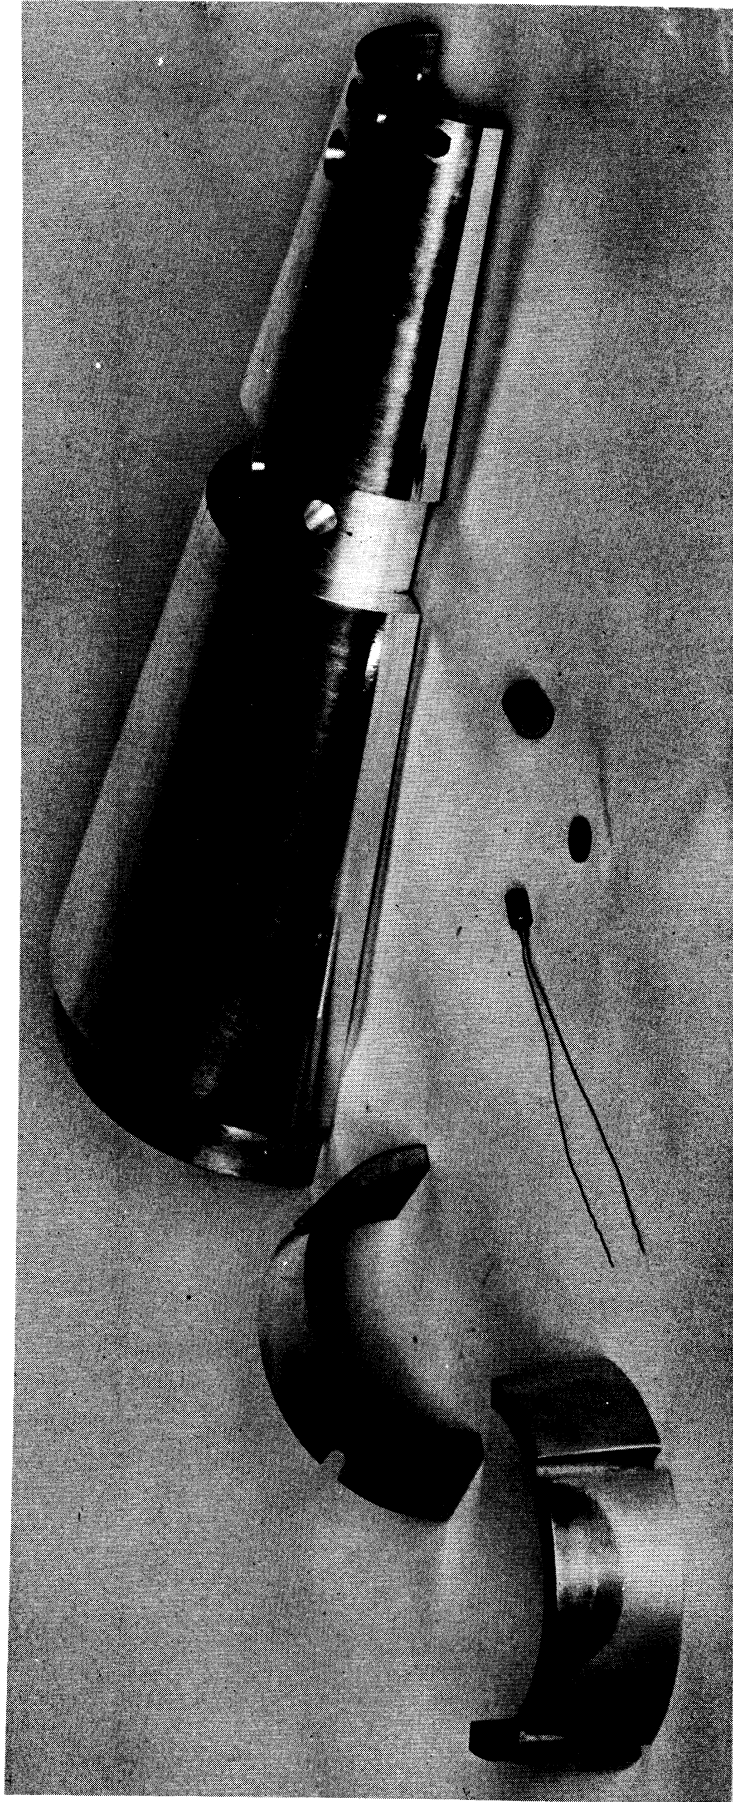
Cone half with squib insulator assembly and frangible ring.
